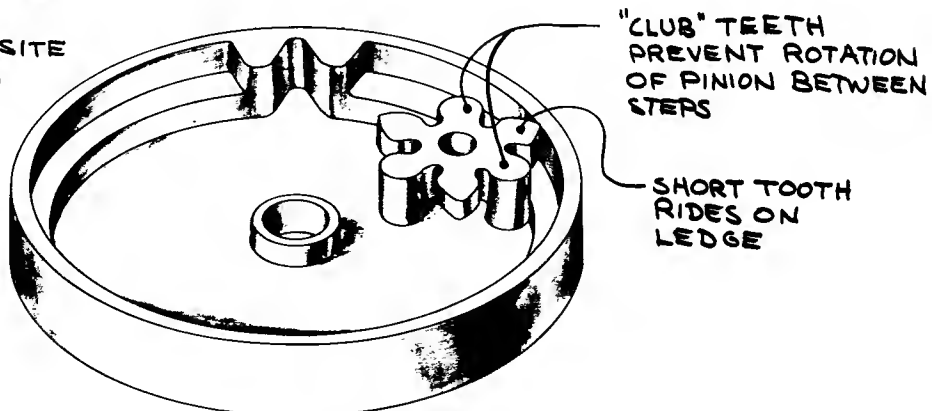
PINION AND CARRIER ASSEMBLY
